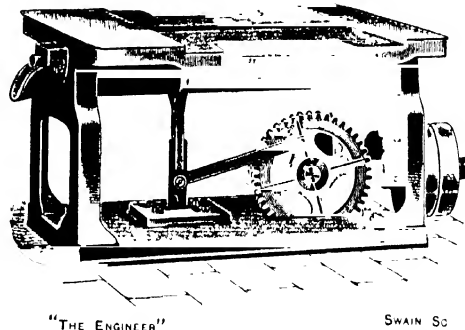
Cake-Paring Machine—Robert Middleton.
